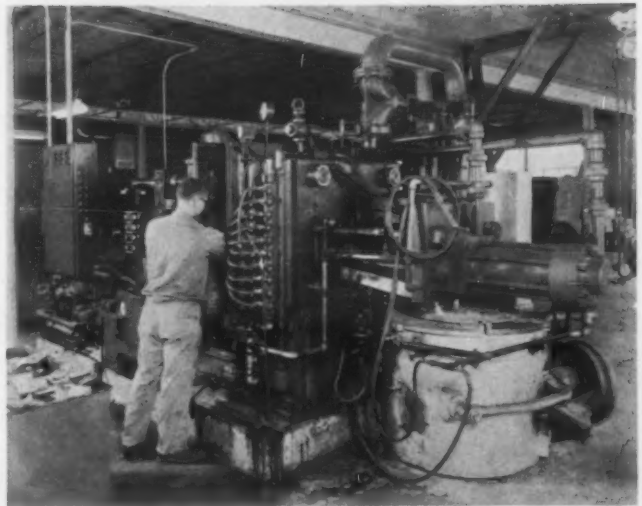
Cold chamber machine expands principles of zinc machine to include evacuation of air from cold chamber.
